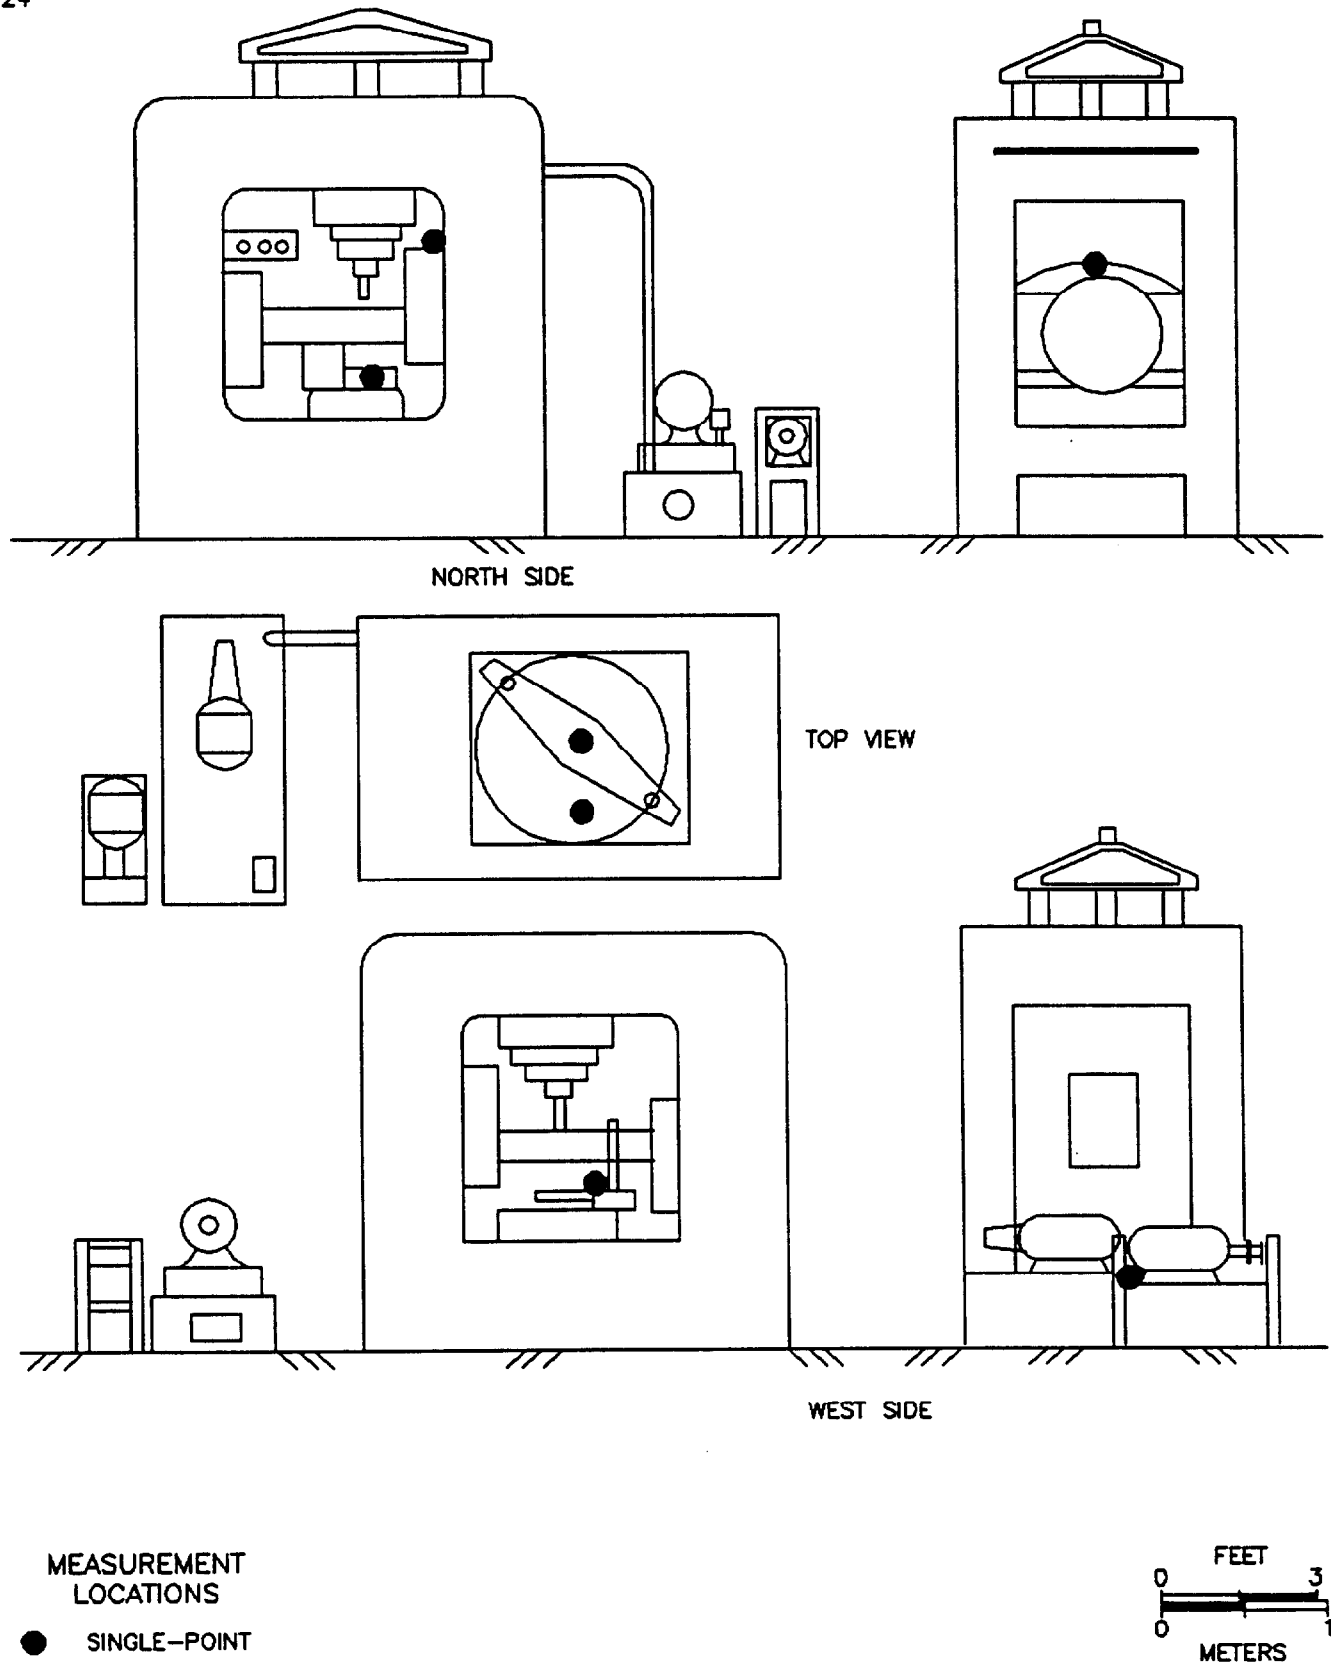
Building 3, Room 102, Hydraulic Press #35443 – Measurement Locations
